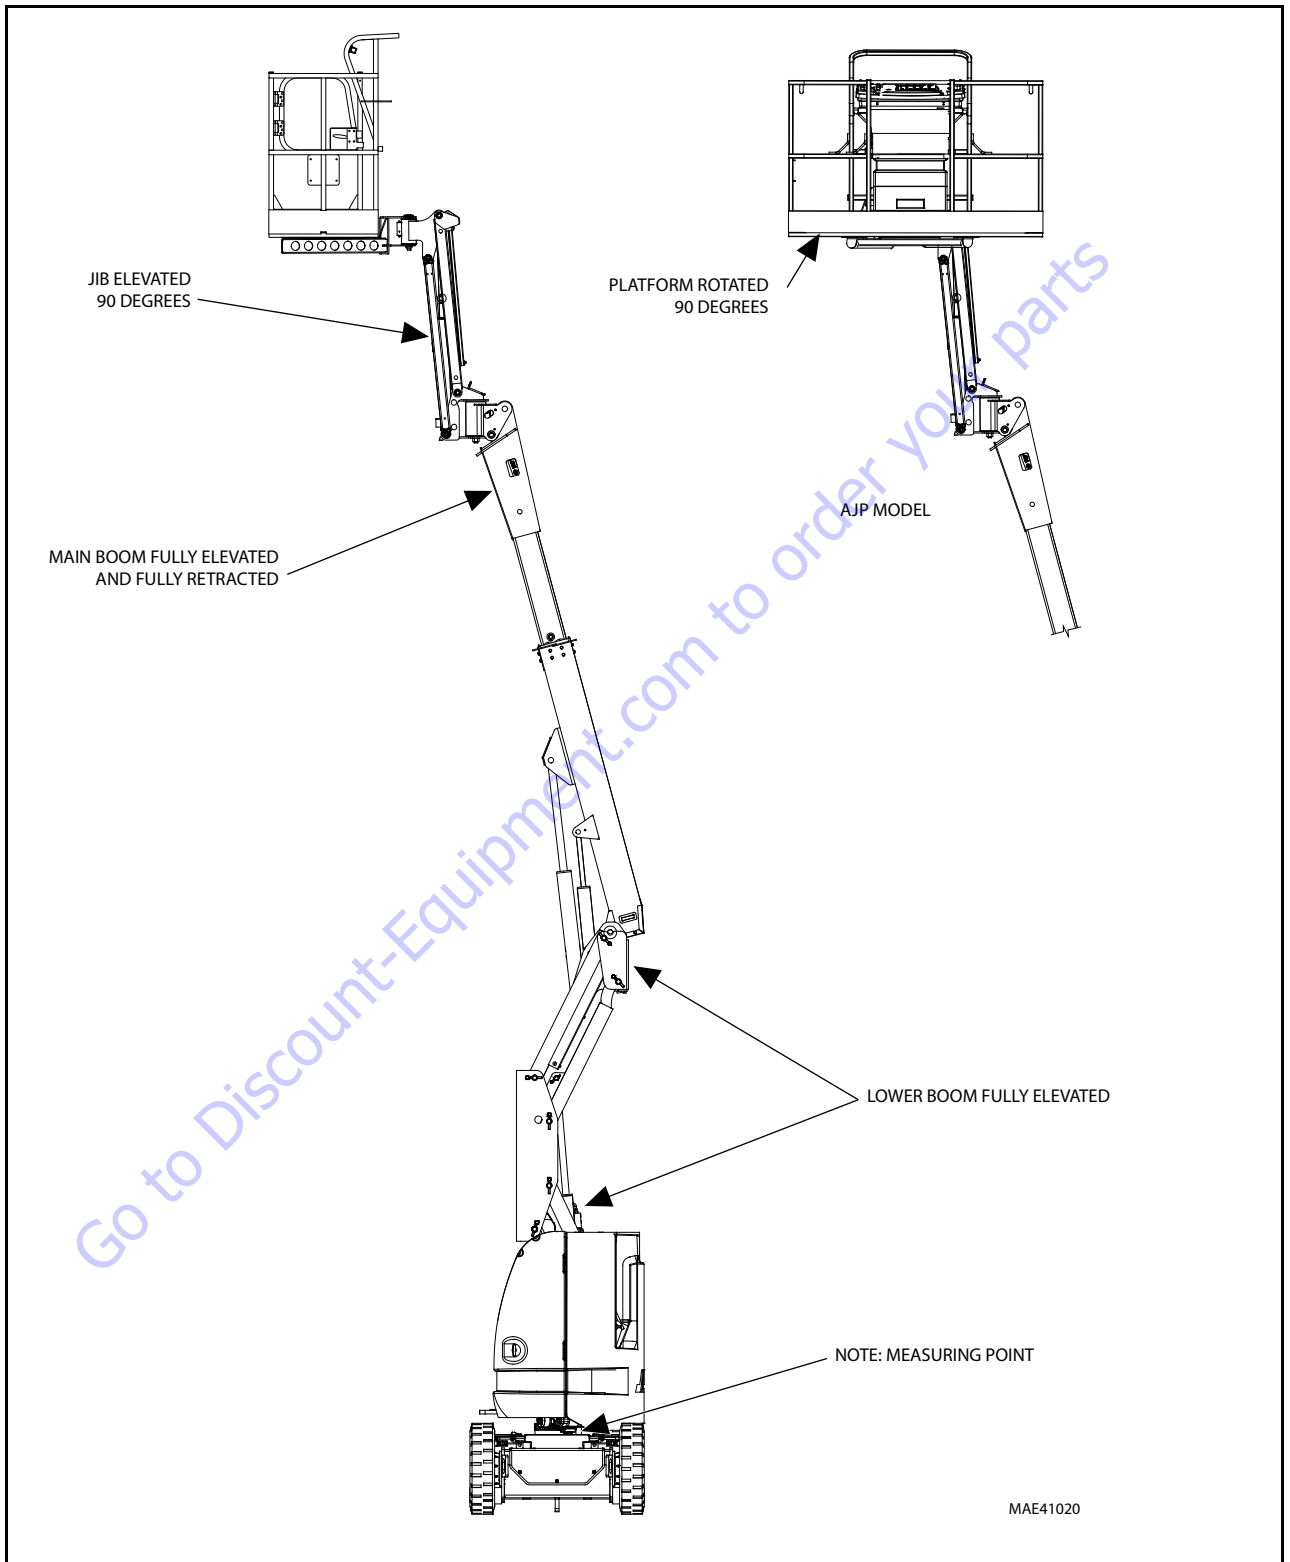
Swing Bearing Tolerance Boom Placement
